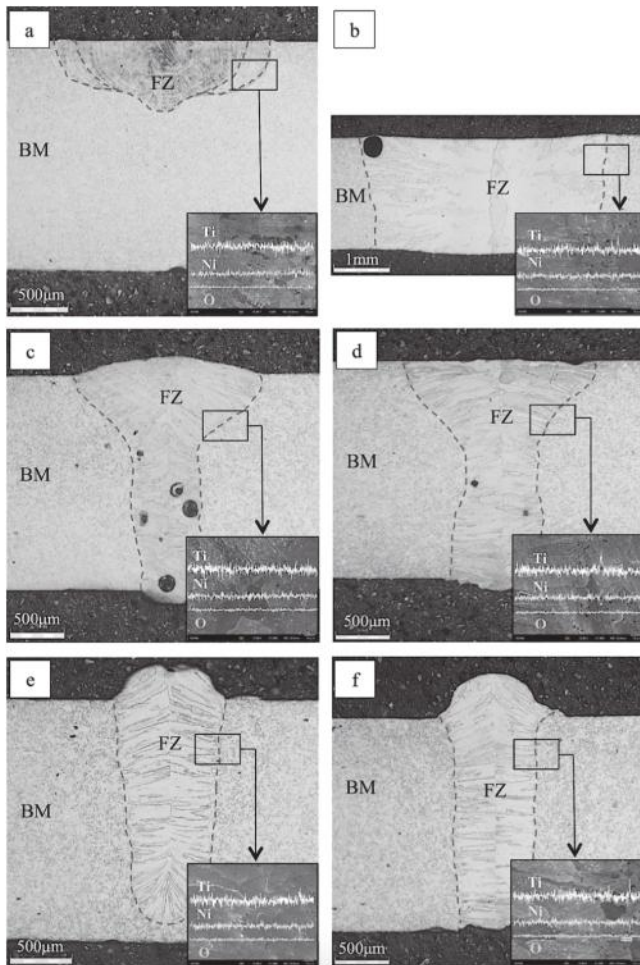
The cross section and linear elemental analysis of the weld seams: (a) C1, (b) C2, (c) K1, (d) K2, (e) K3 and (f) K4.
